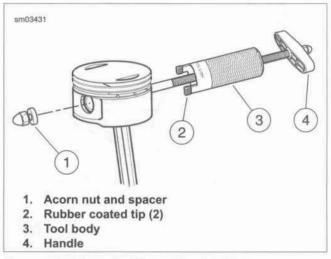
Removing Piston Pin with HD-42320-A Piston Pin Remover
